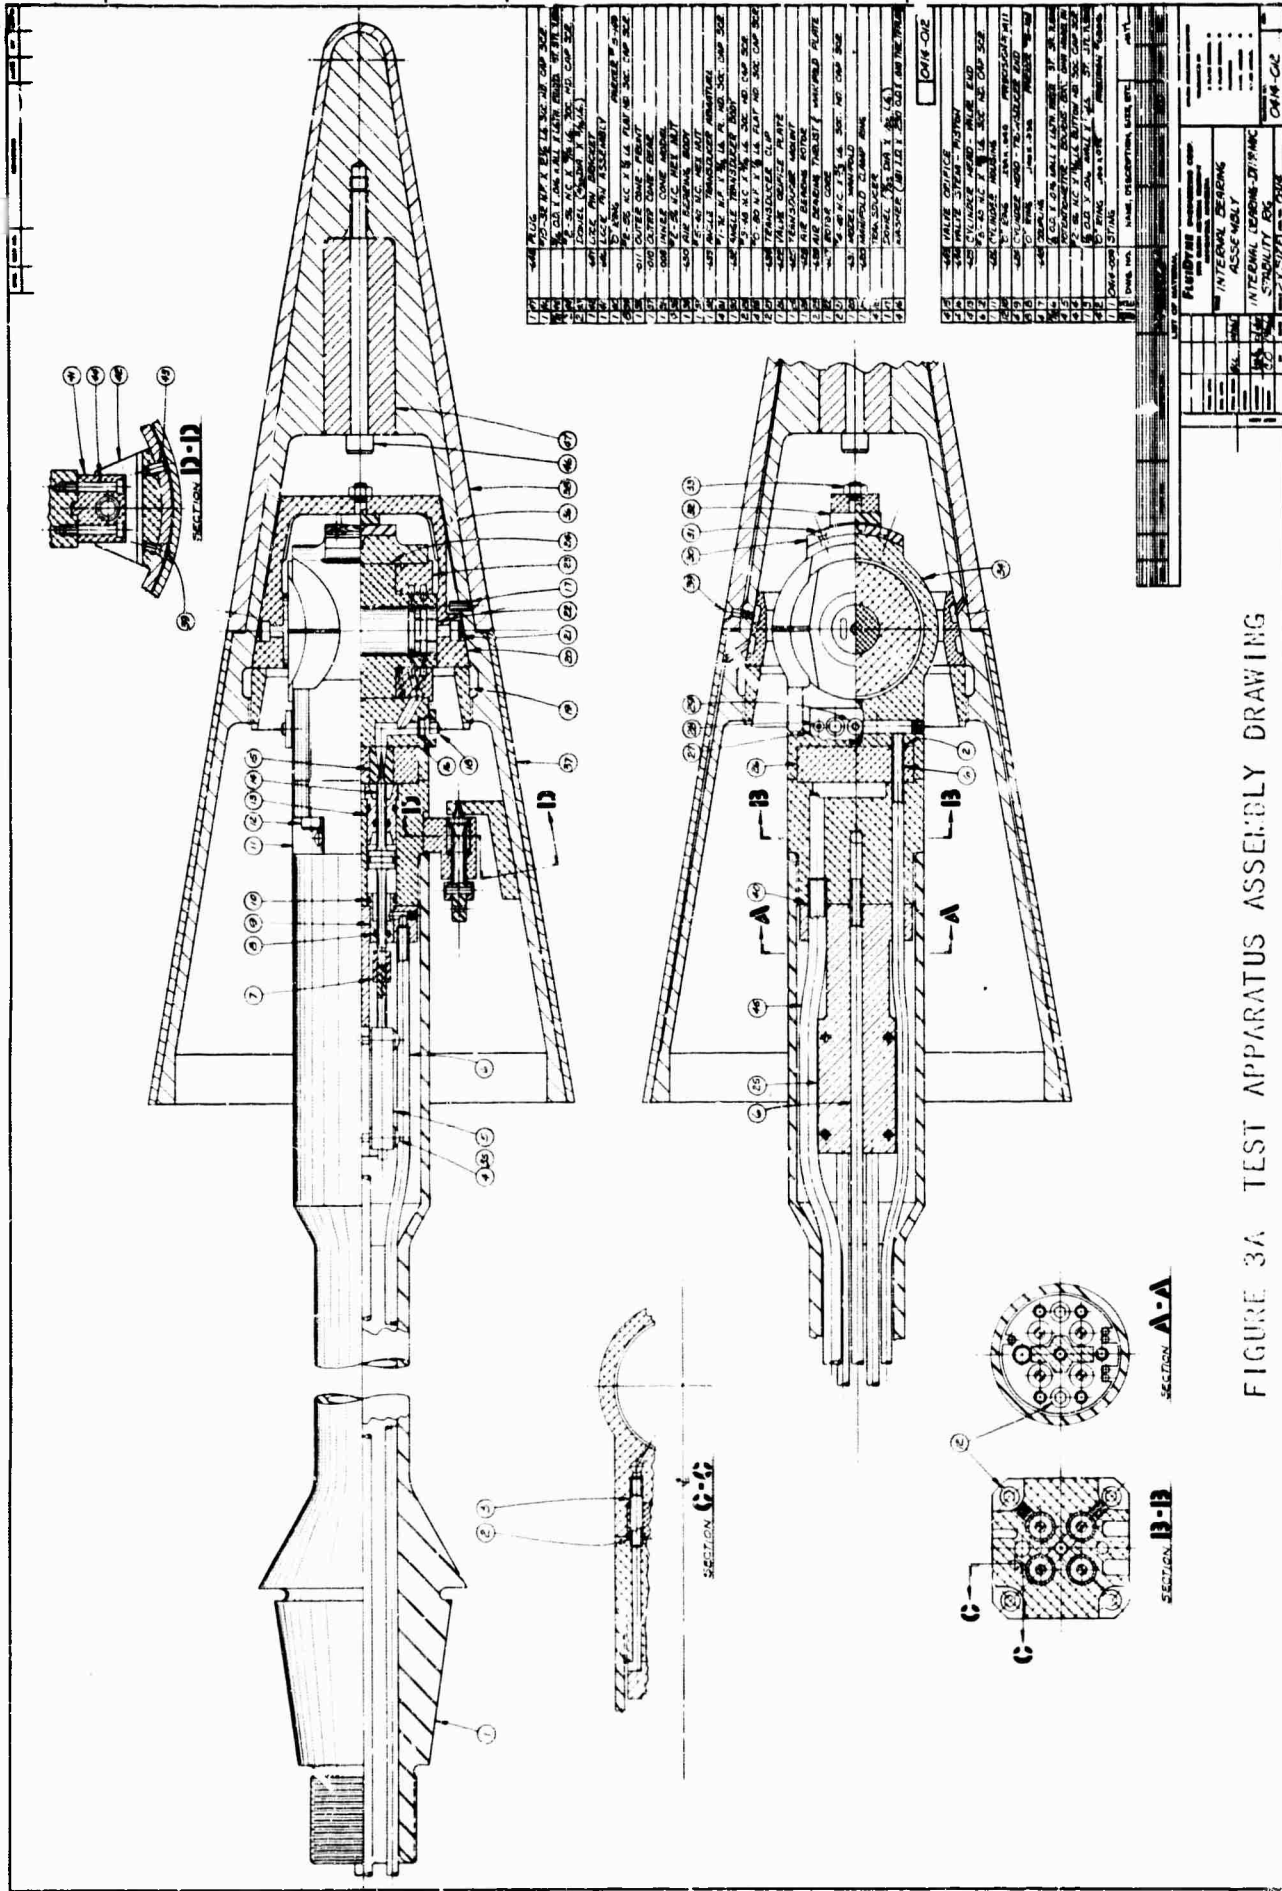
A TEST APPARATUS ASSEMBLY DRAWING
